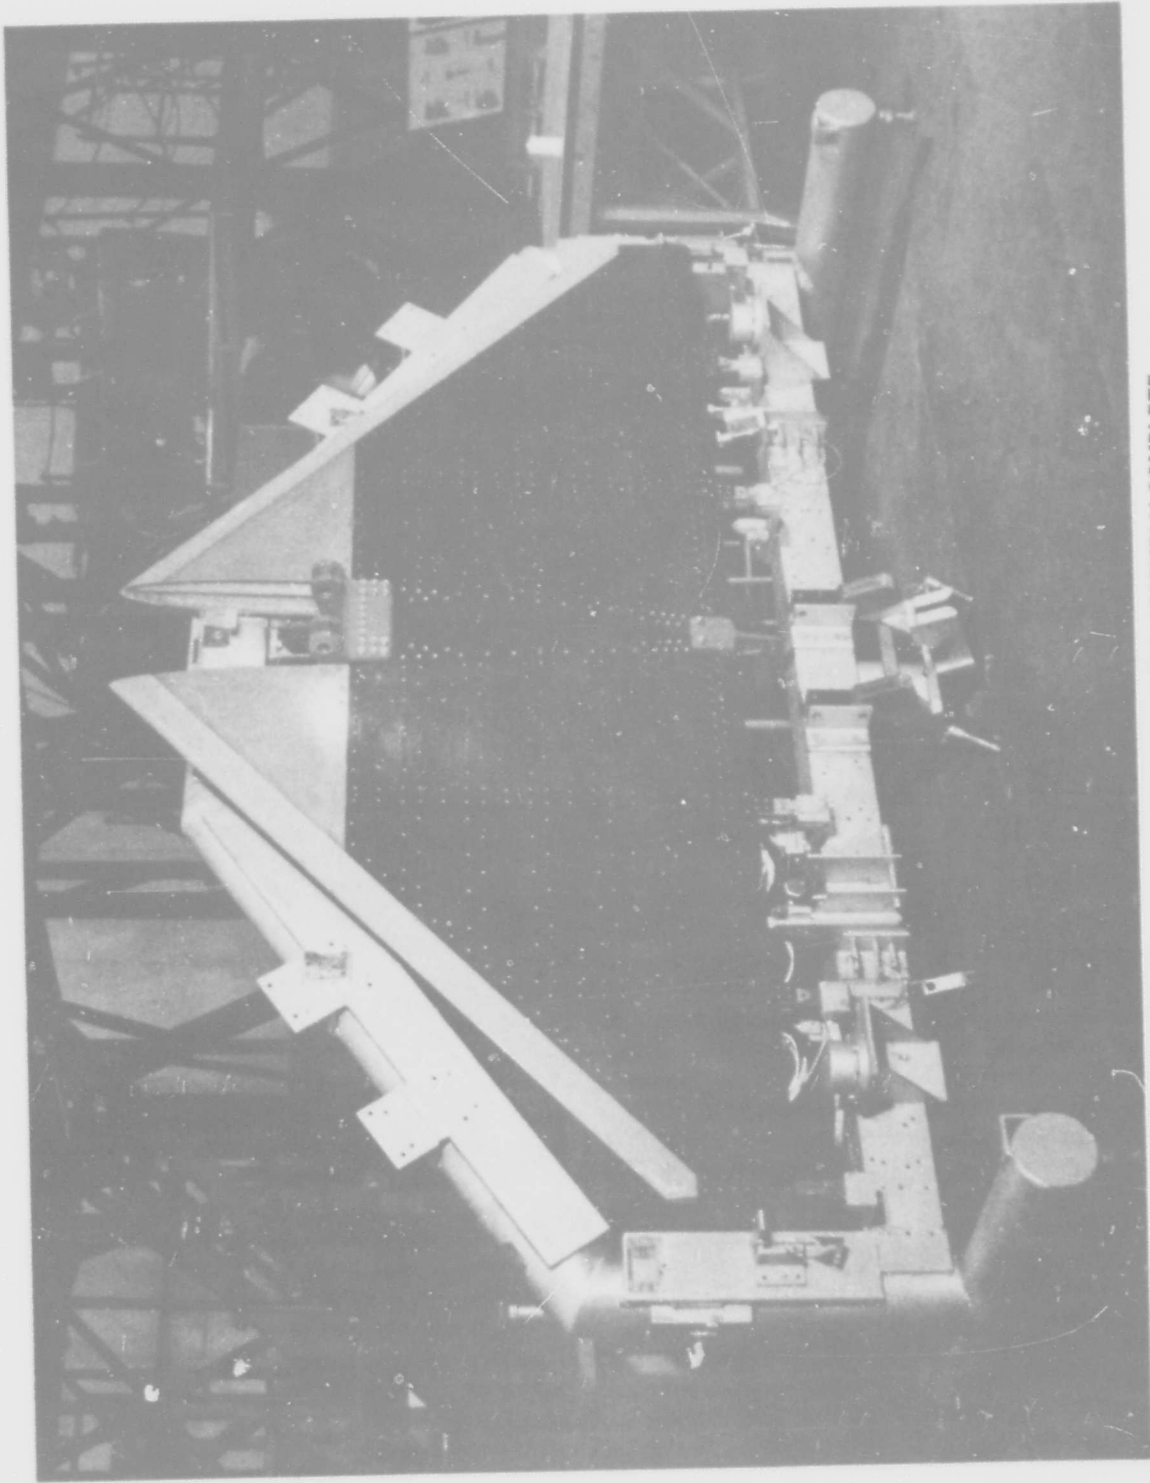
HORIZONTAL STABILIZER ASSEMBLY COMPLETE
